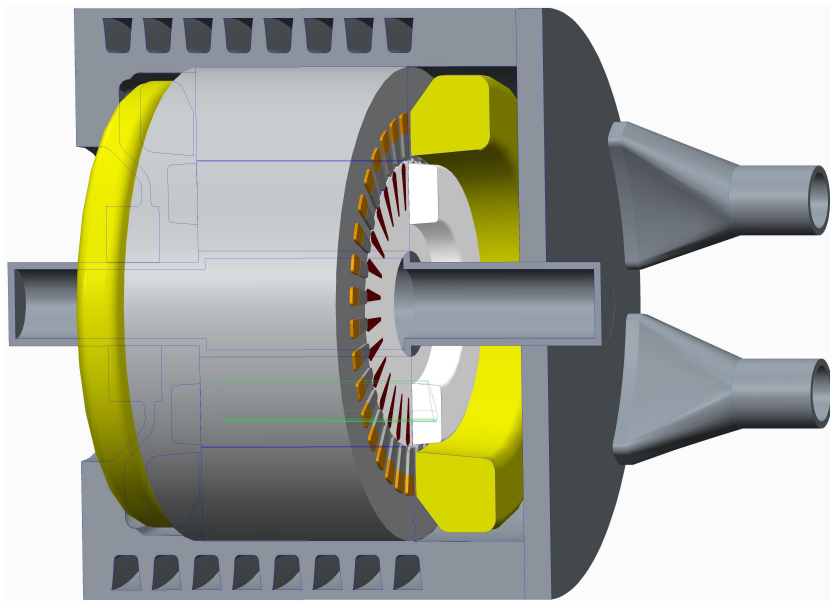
Cut-open view of the 3D CAD machine assembly.
